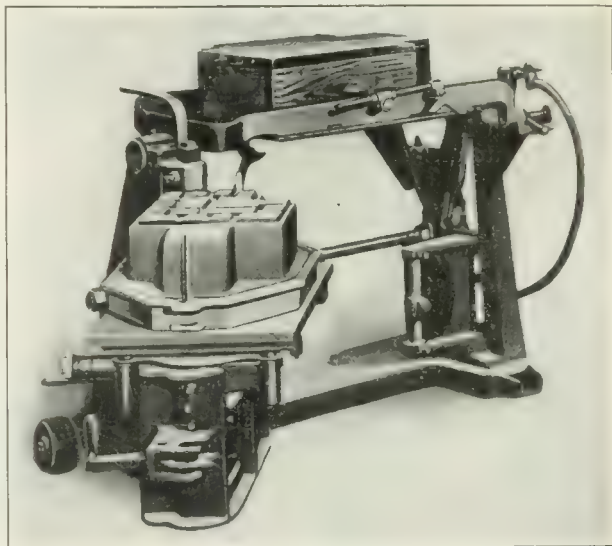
The Direct Draw Roll-Over Molding Machine Built by the Osborn Mfg. Company, Cleveland, Ohio.
